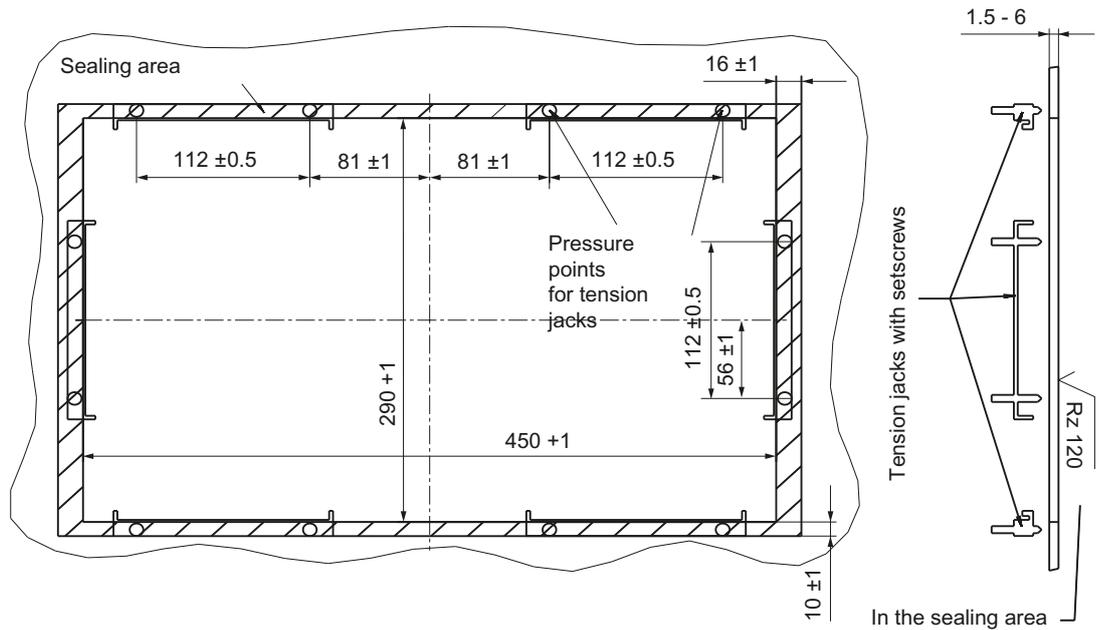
Dimension sheet for installing the OP 015 operator panel front
